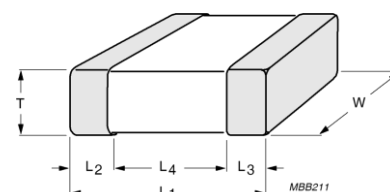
Surface mounted multilayer ceramic capacitor dimension
